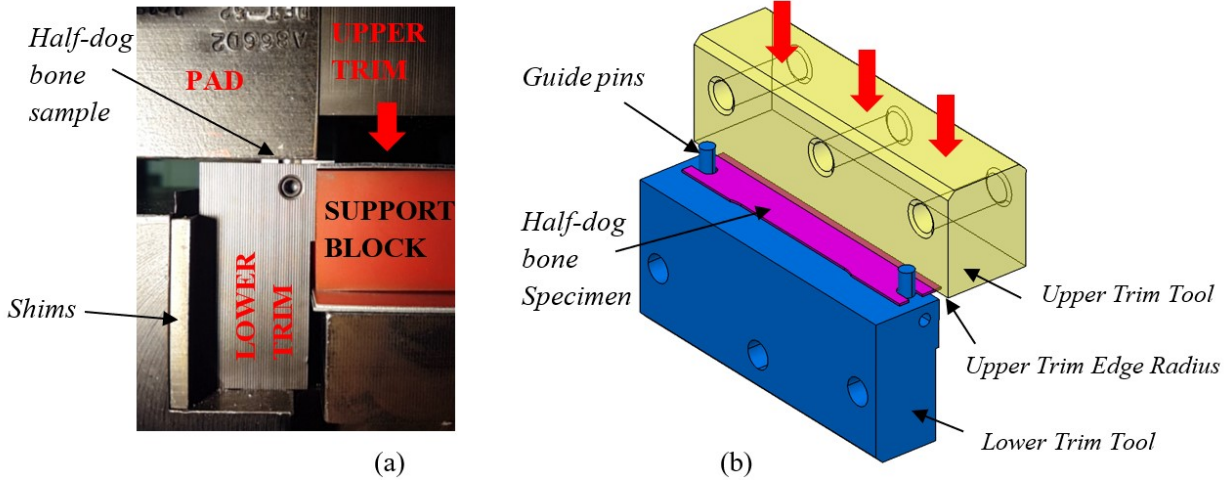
(a) Experimental press side view (b) isometric view of trimming operation without pad or support shown.
